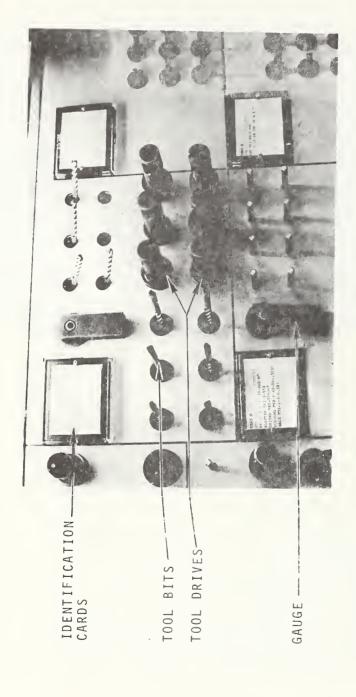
TOOL BOARD - BITS, DRIVERS AND GAUGES FOR FOUR TYPES OF HEAD
